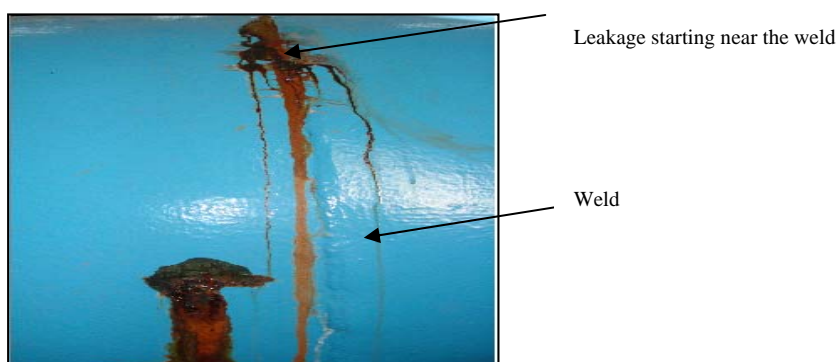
Crack and water leakage starting from the weld zone
